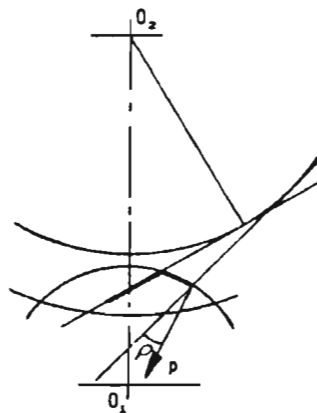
Schematic diagram of irreversible transmission gear with different pressure angle flanks; ρ - tooth bearing friction angle
